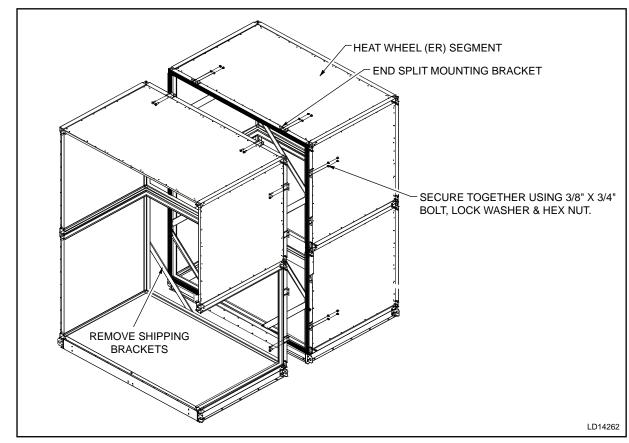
ASSEMBLY OF END CHANNEL SHIPPING SPLIT ((EXPANDED CABINET)
